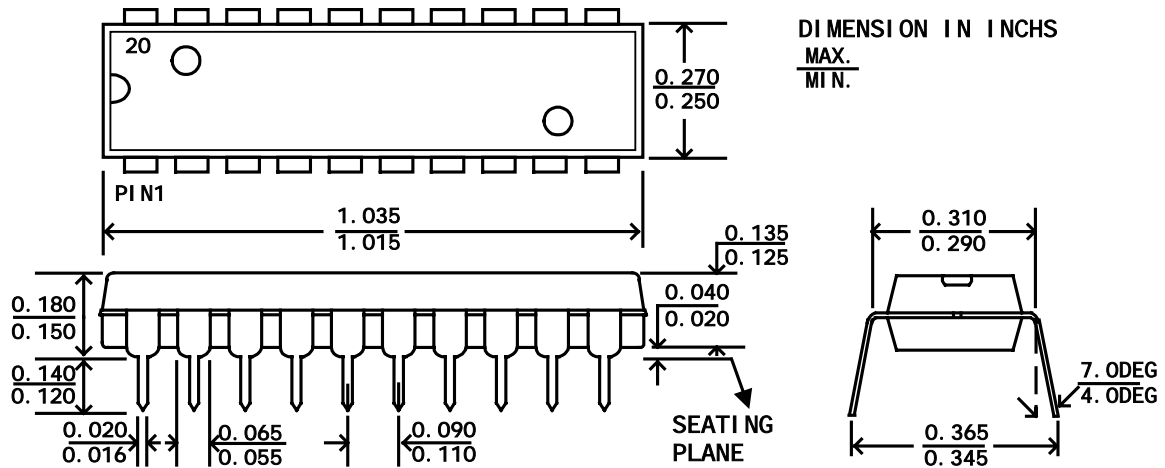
Package Outline Dimension for 20-Pin P-DIP
